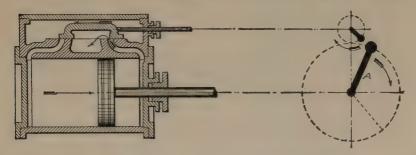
Valve Position with Steam Port Closed on Head End motion of the piston will cause the valve to move toward its midposition.
